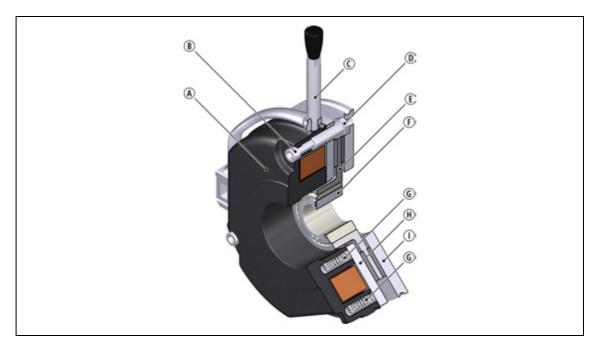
Design of the INTORQ BFK458 spring-applied brake: Basic module N (complete stator) + rotor + hub + flange
